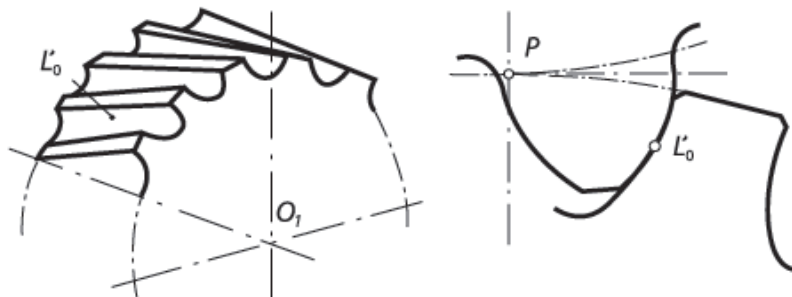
Novikov's gearing with a convex concave butt-end profile of the tooth
